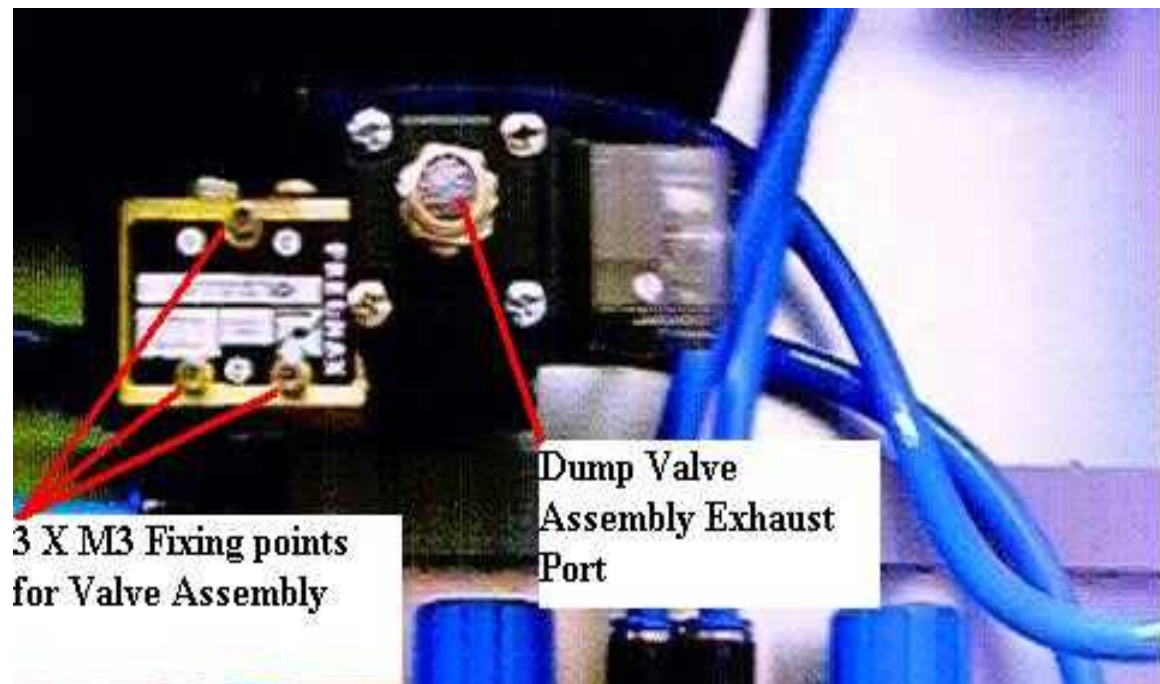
Showing the three M3 fixing points for the Valve Assembly and Exhaust Port
